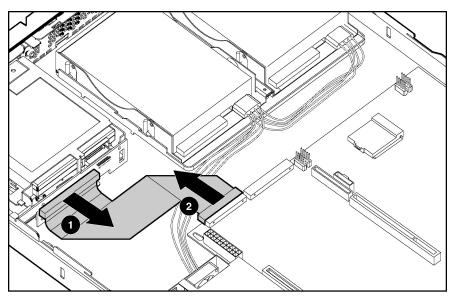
Disconnecting the optical device/diskette drive assembly cable
